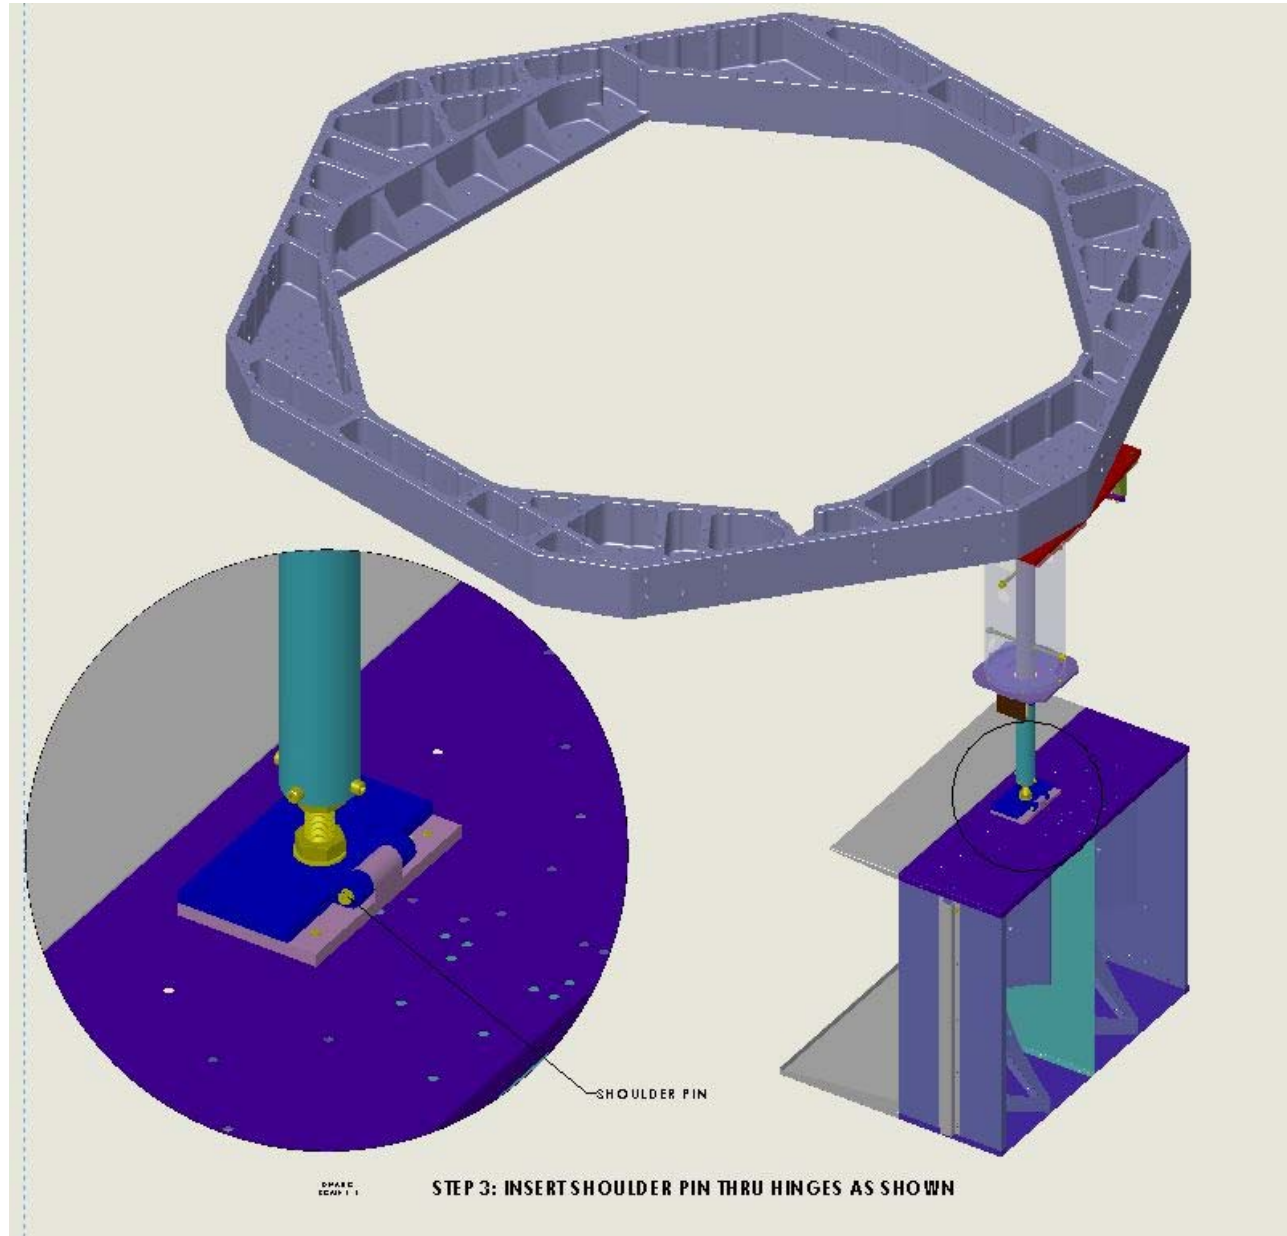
Attachment of Lower Arm Cavity Baffle Assembly to the Suspension
